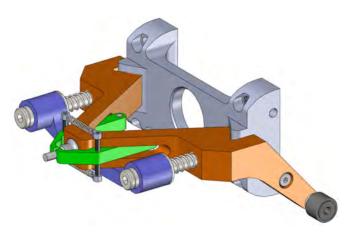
Driver and pressure pad, ready to insert rivet ("drive" position)
